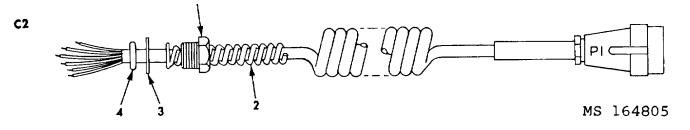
Replacement of headset coiled cable assembly - typical.
